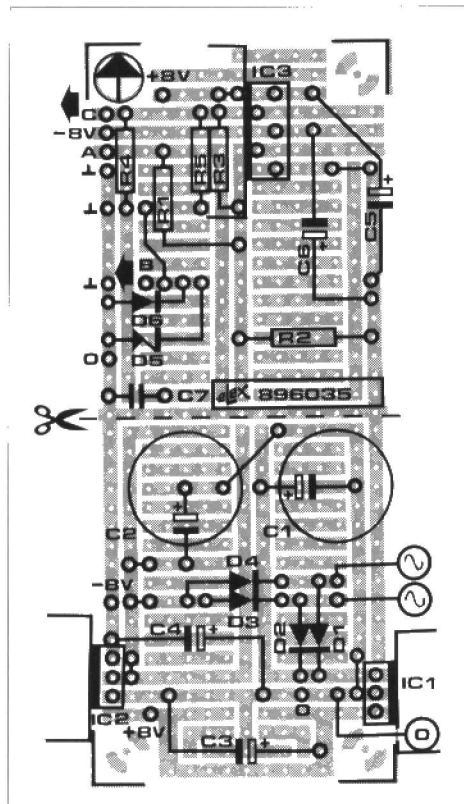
Component mounting plan of the output amplifier board (upper section), and the power supply board (lower section).
